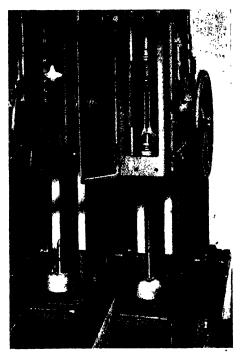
Close-up view of the workhead on one spindle of revolving work-type drilling machine
